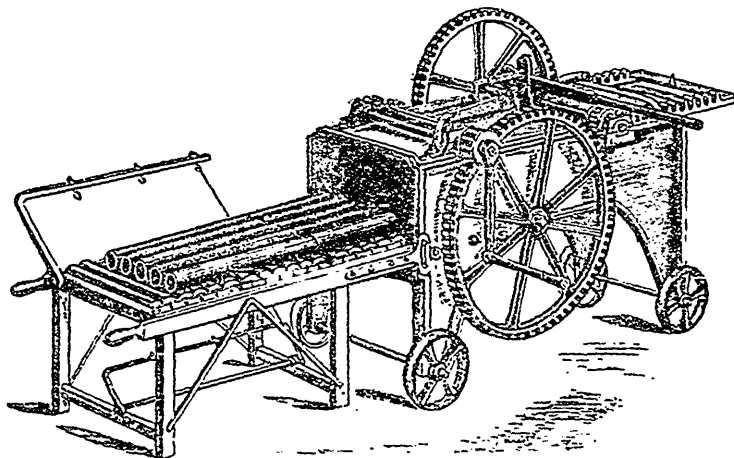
Drain-Tile making Machine—Large size—Hand and horse power.
